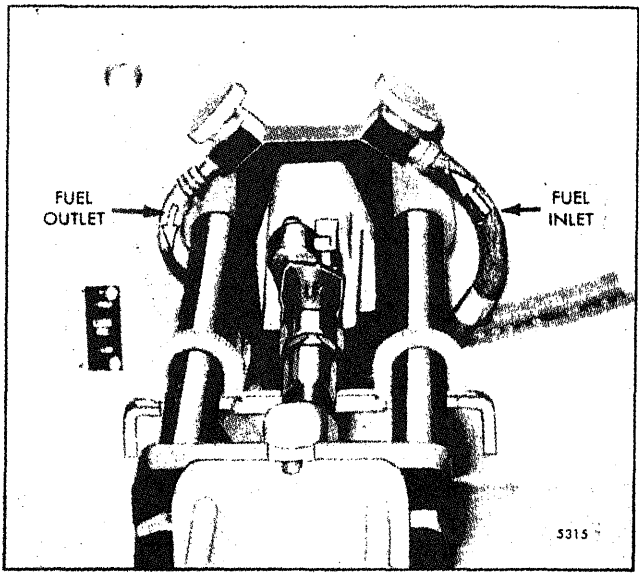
Position of Calibrator Fuel Flow Pipes
